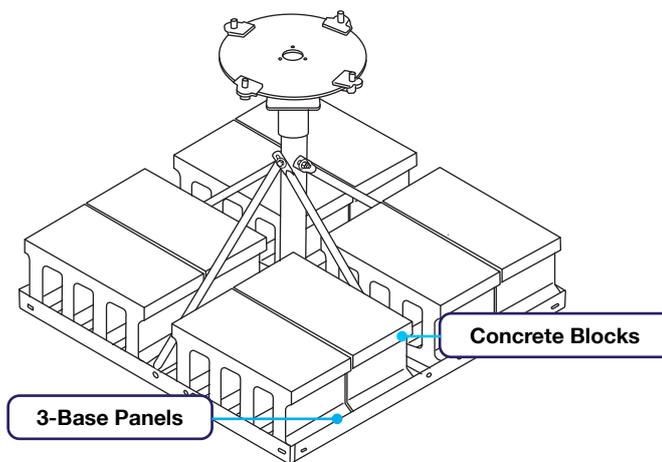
Placing Concrete Blocks on Base Panel of NPM
